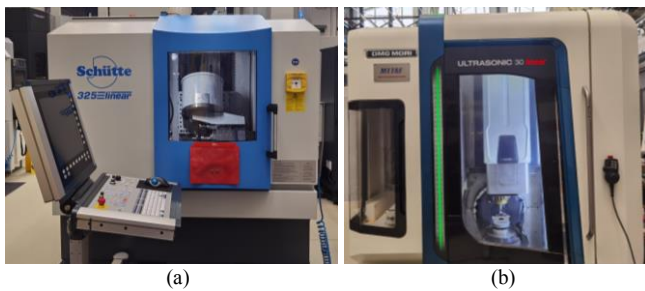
(a) Flat grinding machine; (b) Deep grinding machine.
